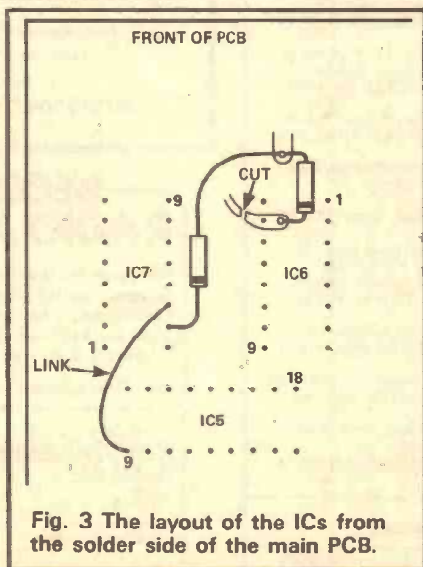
The layout of the ICs from the solder side of the main PCB.
